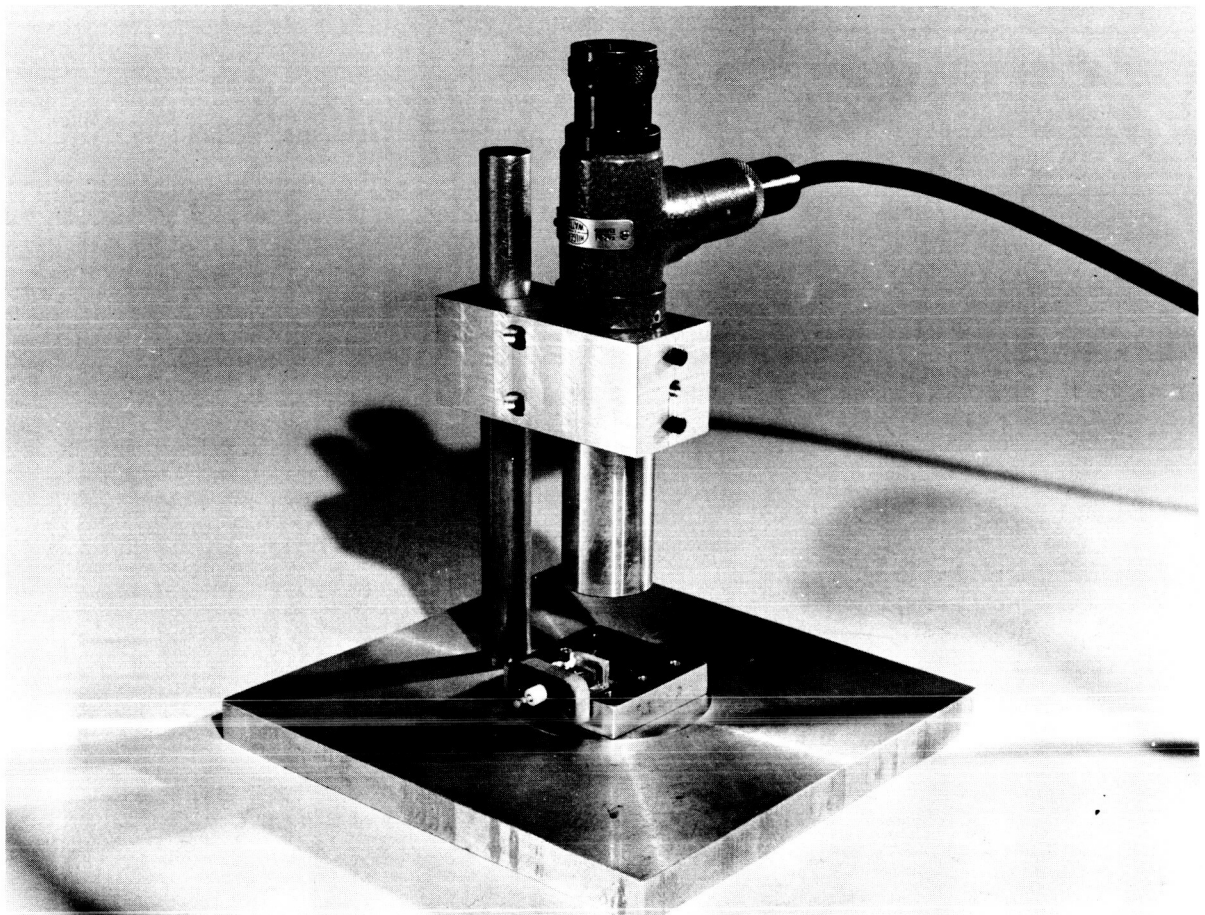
Autocollimator used in alignment of parts during assembly.
